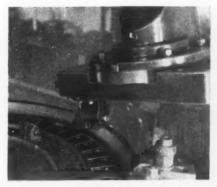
Close View of B & S Miller with Slotting Attachment.
